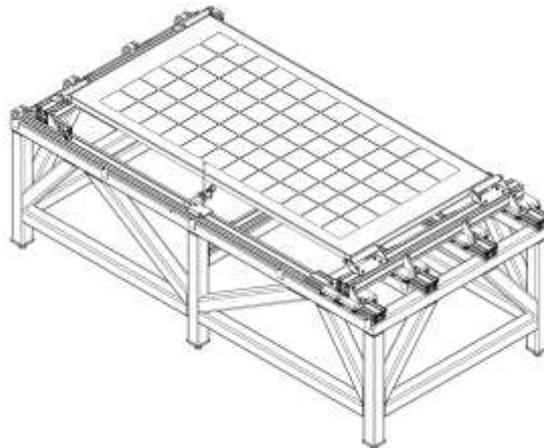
Solid steel test jig designed to enable 5B and standard module mounting configurations
